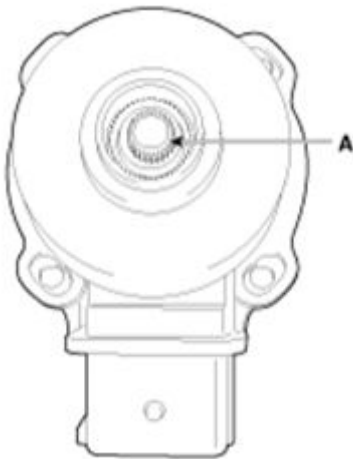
Identifying Clutch Actuator Motor Screw
